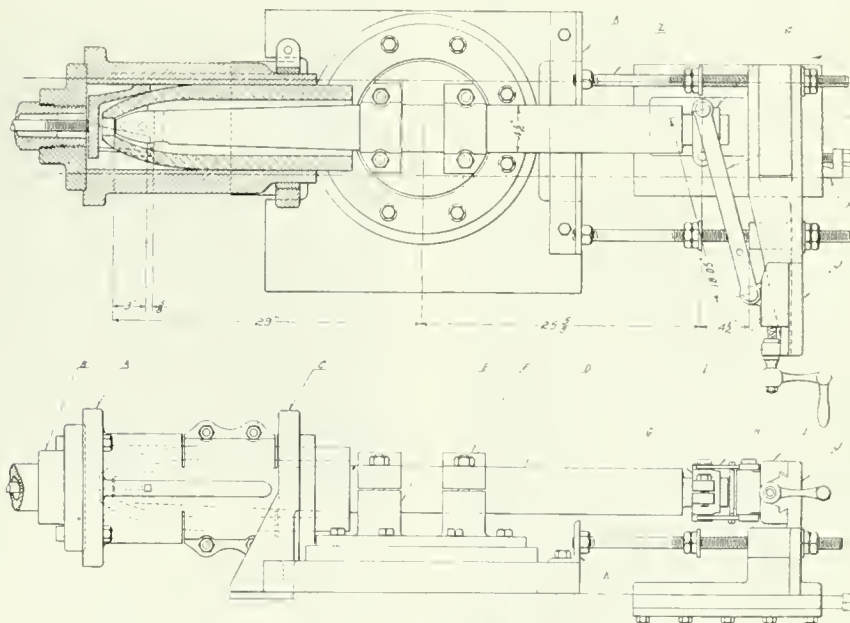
ROUGH BORING ATTACHMENT ON "PETRIE" LATHE.
